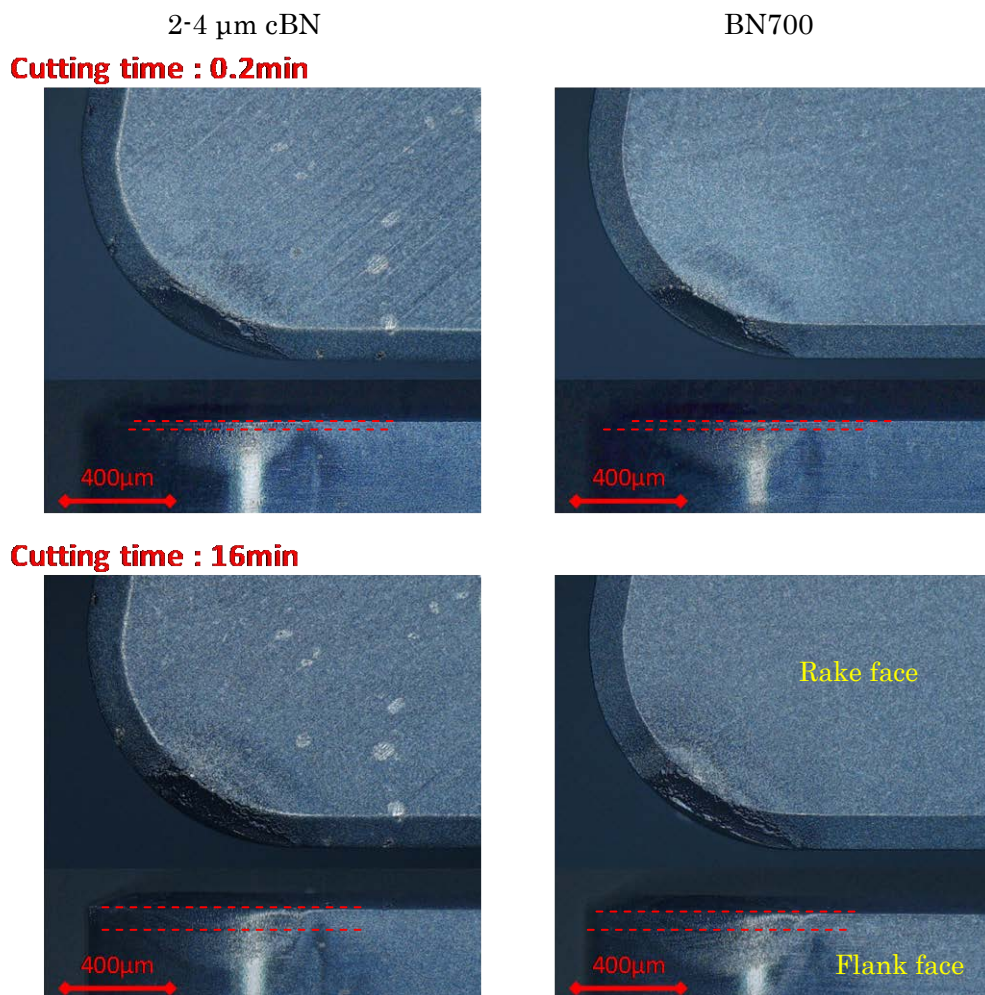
Tip-edge of the PCBN cutting tools after finishing of FC300.
